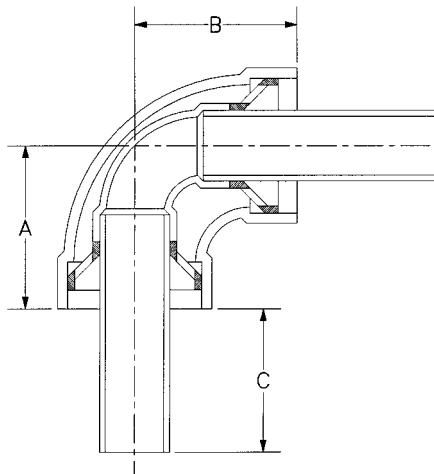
Restrained thermoplastic 90° elbow combination for parts using socket-type joining systems whereby the carrier elbow is a single 90° elbow. (*Patent Pending; Orion Fittings, Inc.*)
